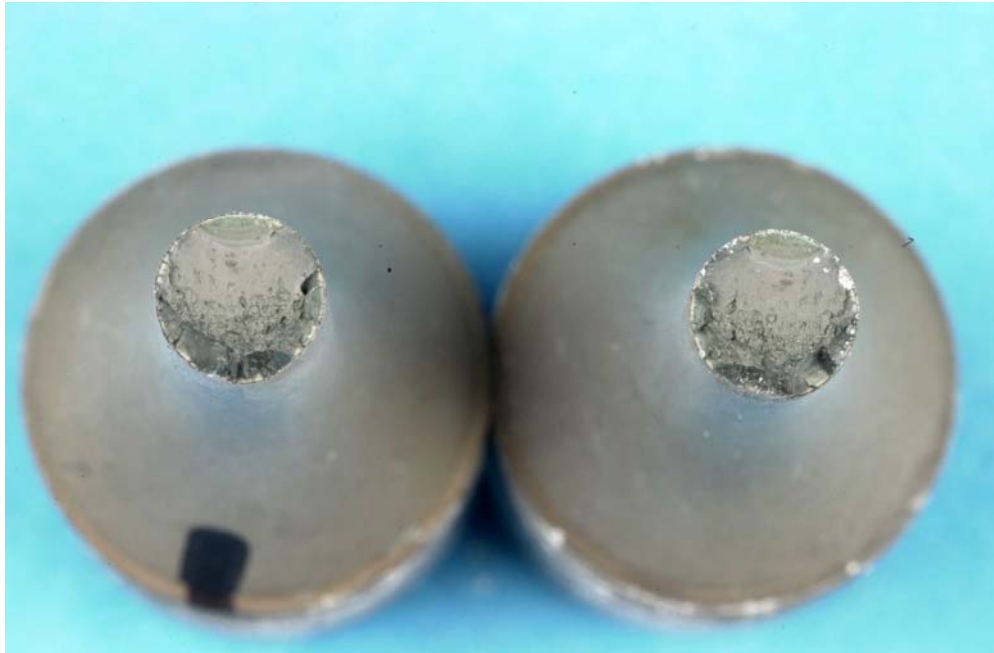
Fracture surface for  $R = 0.1$ ; 1900°F; 6,879,073 cycles.
